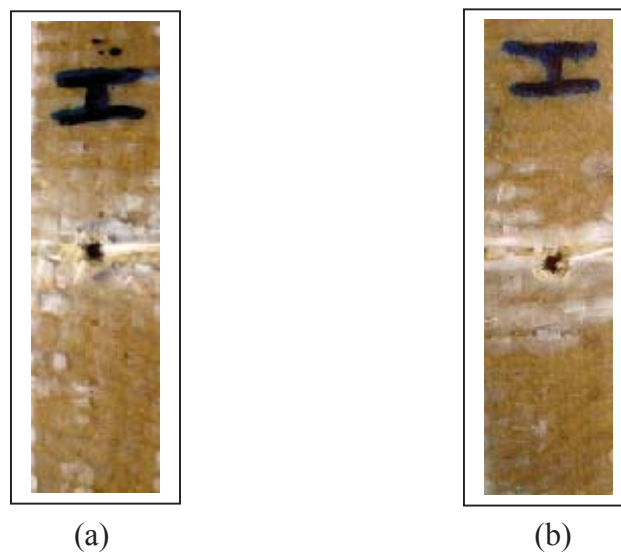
fracture modes of (hybrid/ polyester) a- moulded-in hole, b- drilled hole
